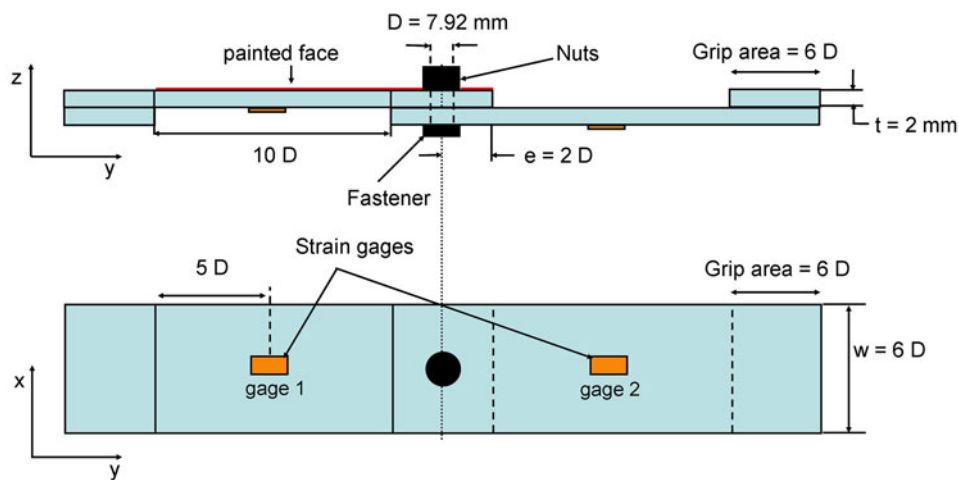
single-shear lap joint, simple fastener test specimen schematic [9]
